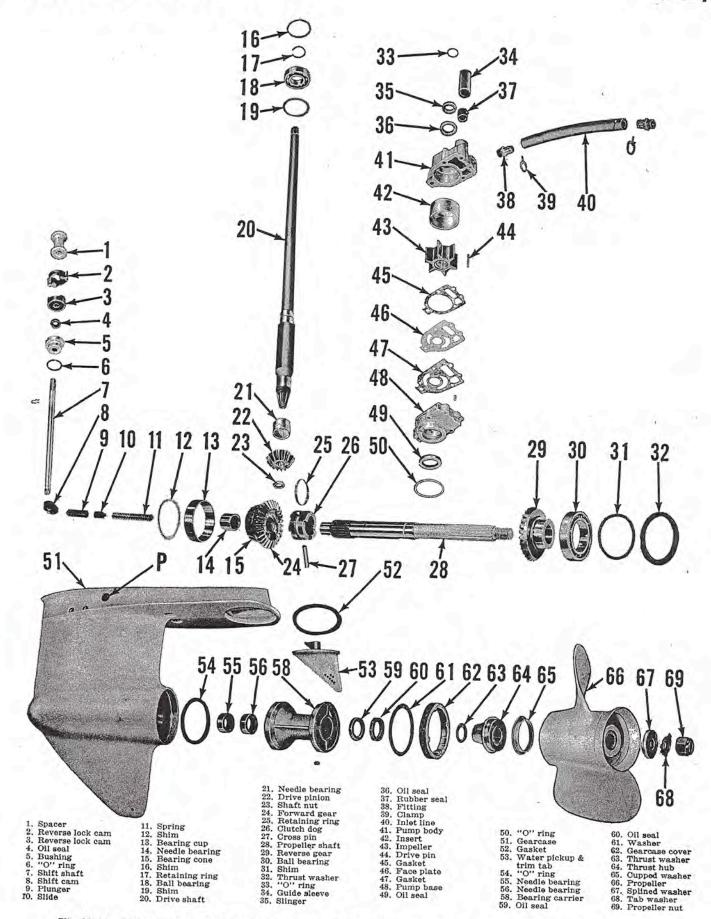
Exploded view of lower unit gearcase and associated parts used on six cylinder, full gear shift models.
